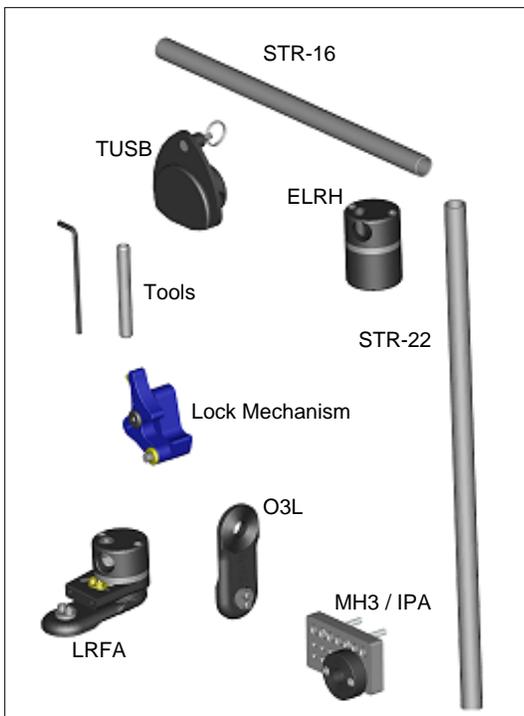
Standard Parts layout for the DAESSY Lockable Rear Folding Mount DLRFM8
